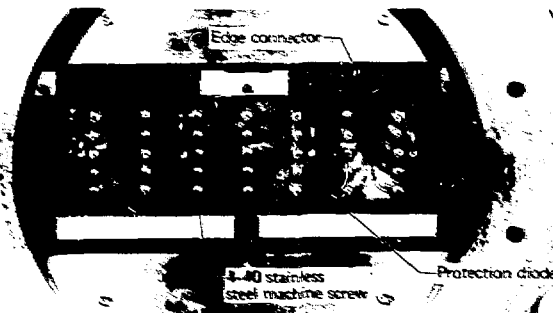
Back view of beam-profile-monitor pc board in beam-target assembly.
